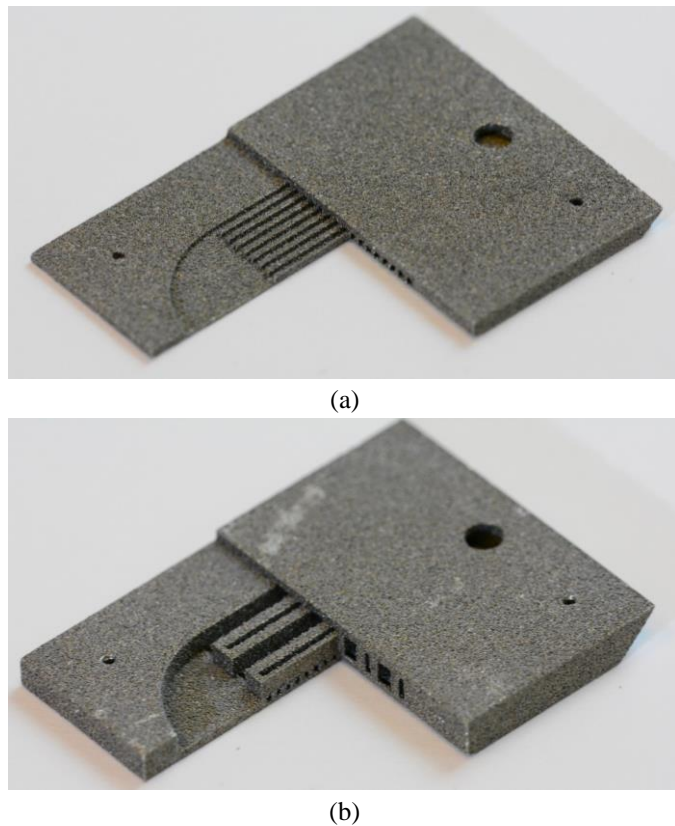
Images of the (a) SMC and (b) MMC additively manufactured heat sinks. These samples were produced with sections removed to allow for visualization of the channel geometry.
